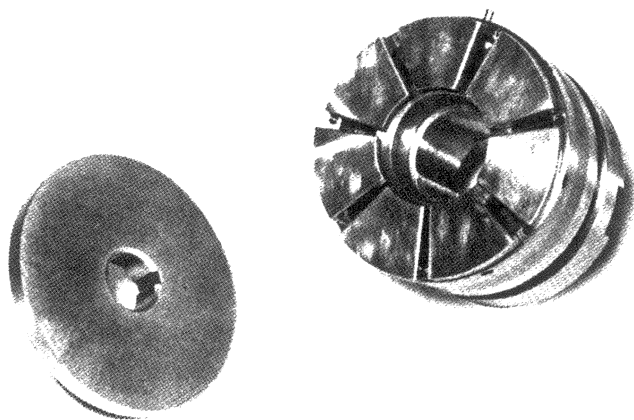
Journal and Double Thrust Bearing Cartridge for Gas Turbine. (designed and built by Abramovitz Associates, Inc.)
